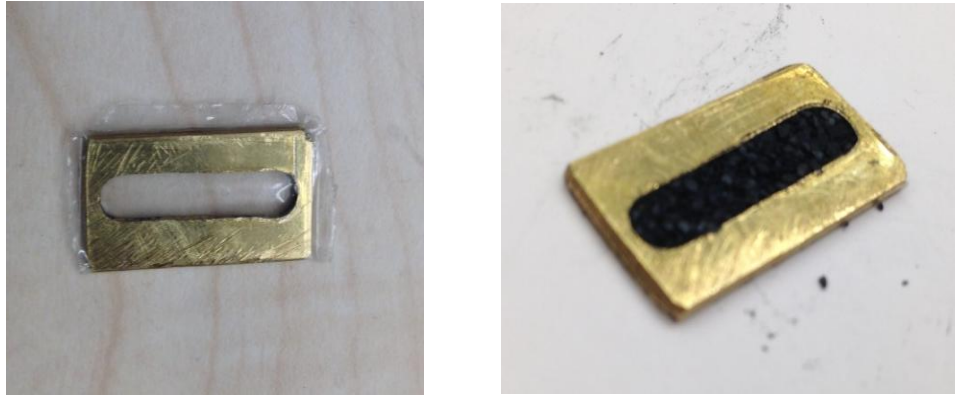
Conductor plate shaped by a lathe machine and first prototype of limiter plate
